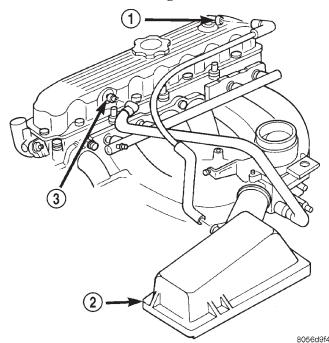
Install Orifice Tool 2.5L 4-Cylinder Engine
